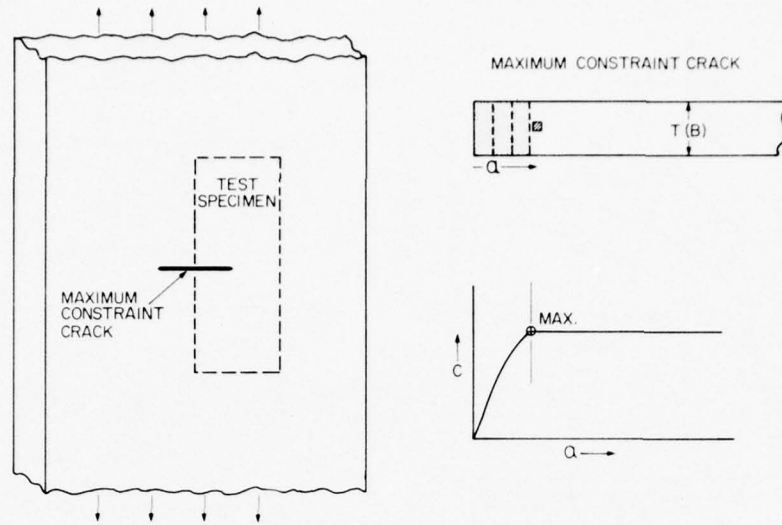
Basis for design of fracture test specimens with maximum constraint cracks.
